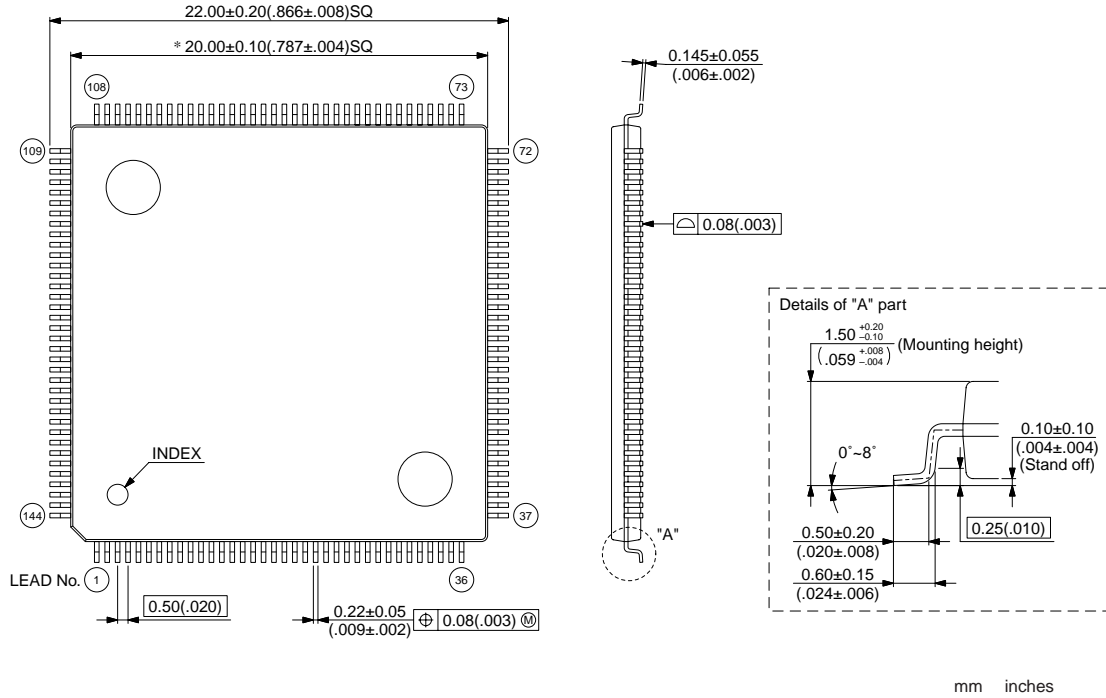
Mechanical Dimensions of Patch-Panel ASIC (LQFP144). The unit is mm (inch).
